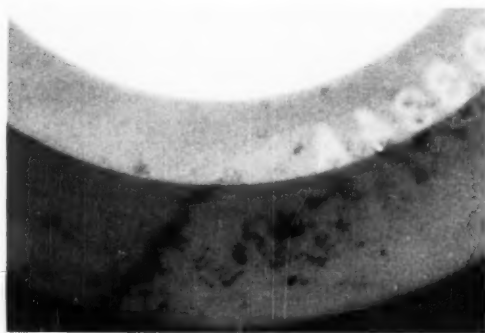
Radiographic images of entrapped sand and gas formations in a steel casting are readily identified.
